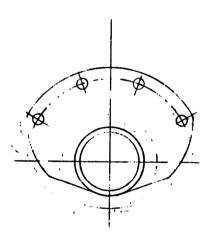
Alternate design (sun gear mounted in antifriction bearings).
